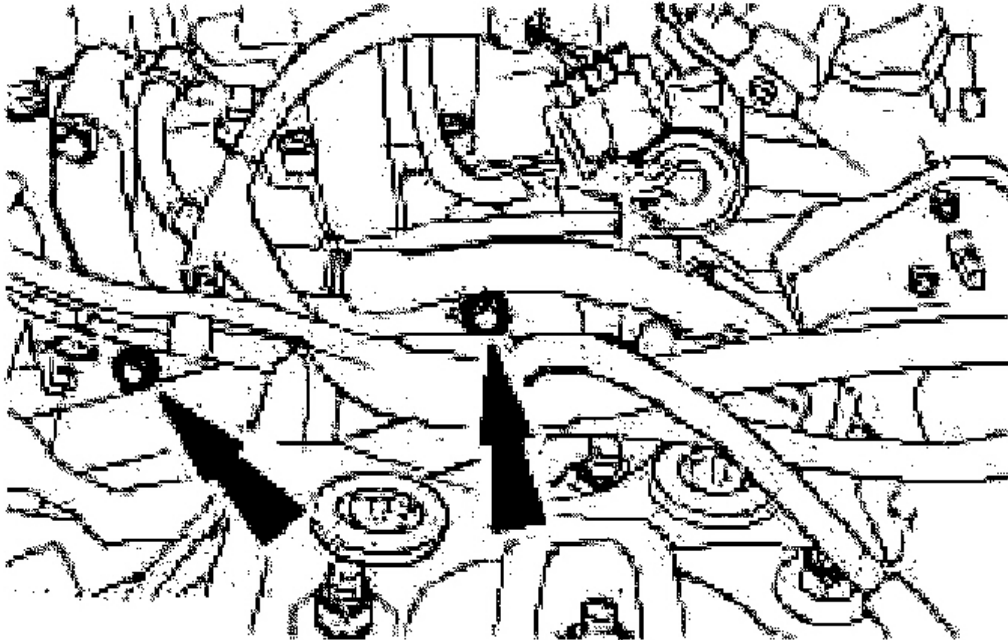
Securing Engine And Transmission Assembly To Hoist Using Special Tools
